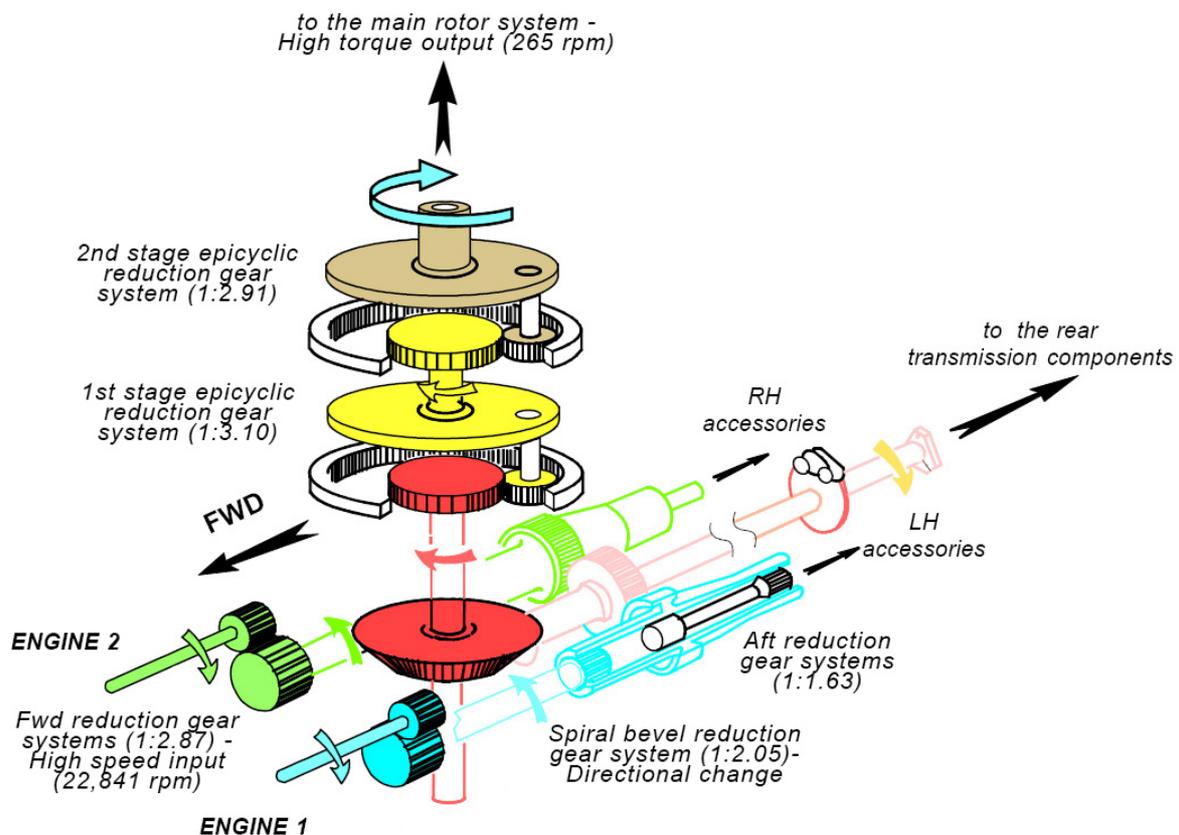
Category "A" Helicopter MGB Drive Schematic (Source: Helicopter Manufacturer)
